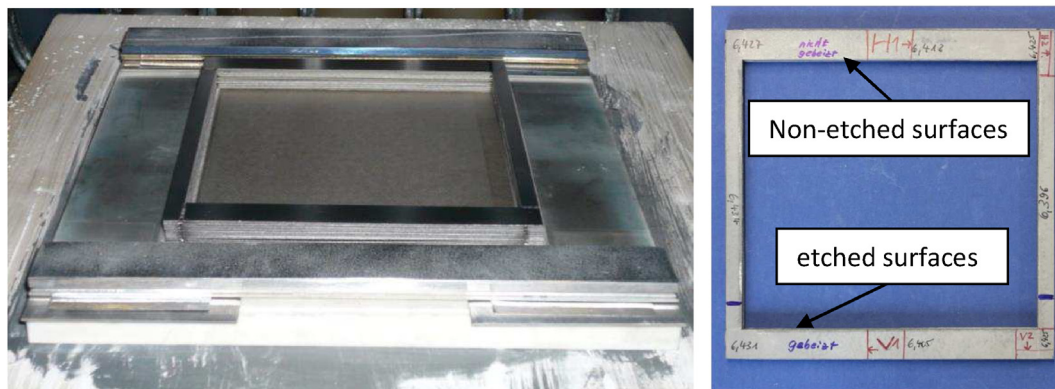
Process validation, assembly of five frames before (left) and after (right) diffusion welding.
